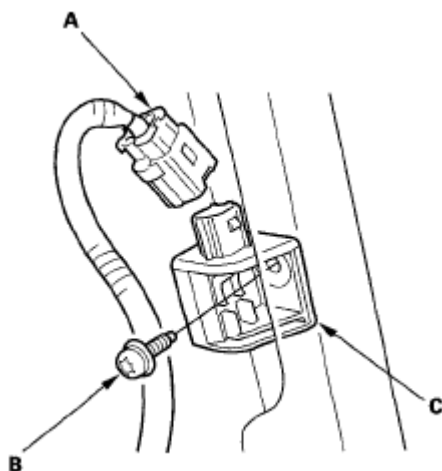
Identifying Side Impact Sensor (Second) And 2P Connector
